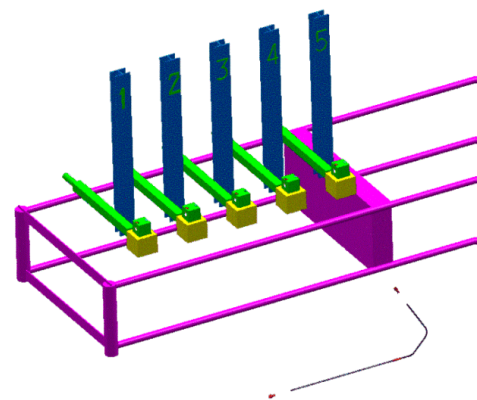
CATIA model of the UCJ with pipe to be assembled
